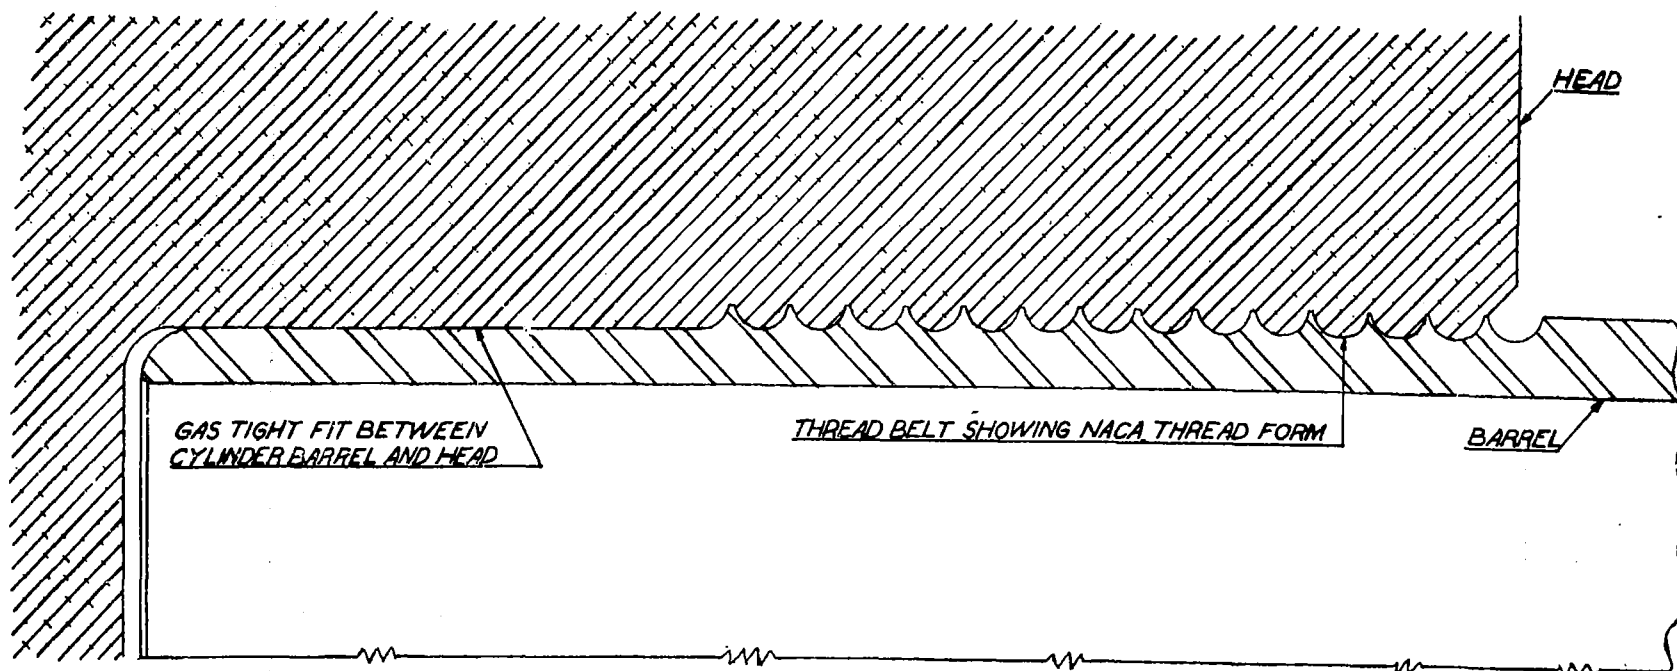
SECTION SHOWING CYLINDER ASSEMBLY
